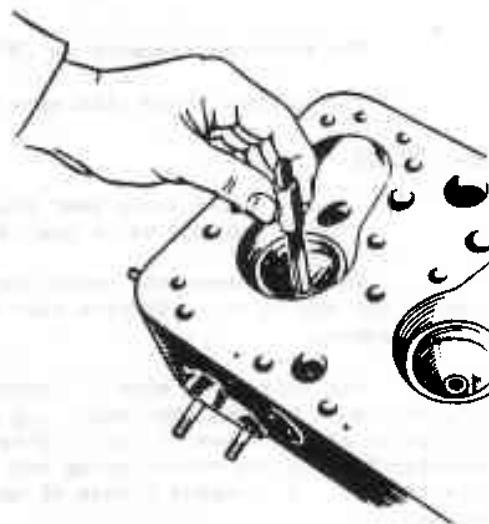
CHECKING INLET VALVE GUIDE WITH PLUG GAUGE.
